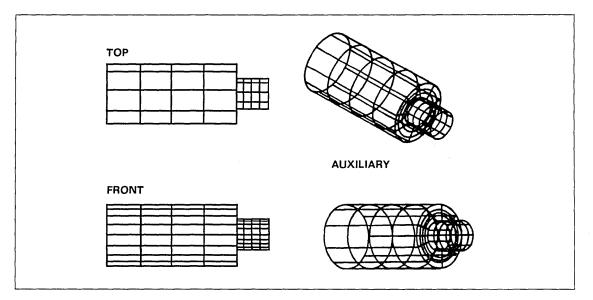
Front and Auxiliary Views--Cannot Be Aligned Because of Fold Angle
